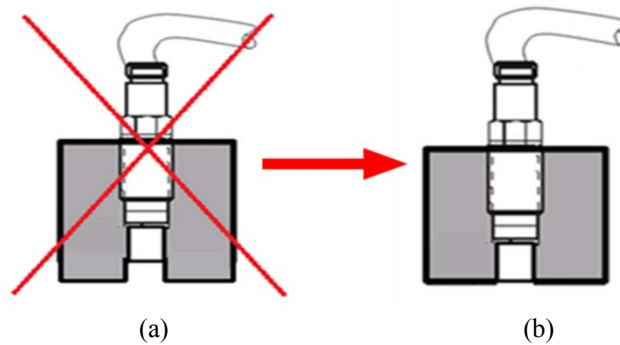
(a) Wrong mounting of the pressure sensor due to a gap between the sensor diaphragm and object surface; (b) Flush mounting
